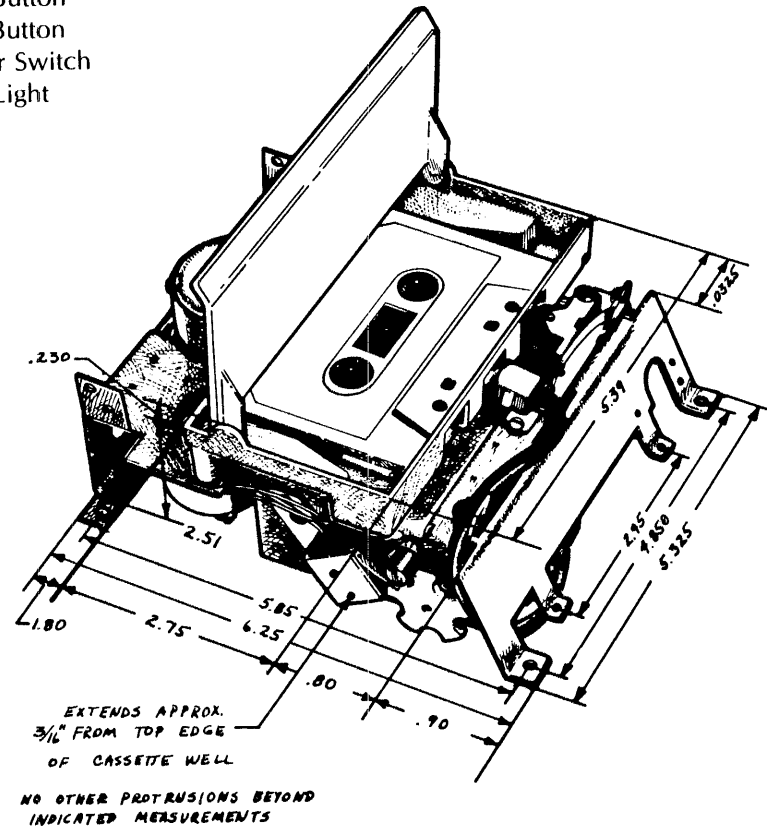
DIMENSIONS OF DEMONSTRATOR TRANSPORT
